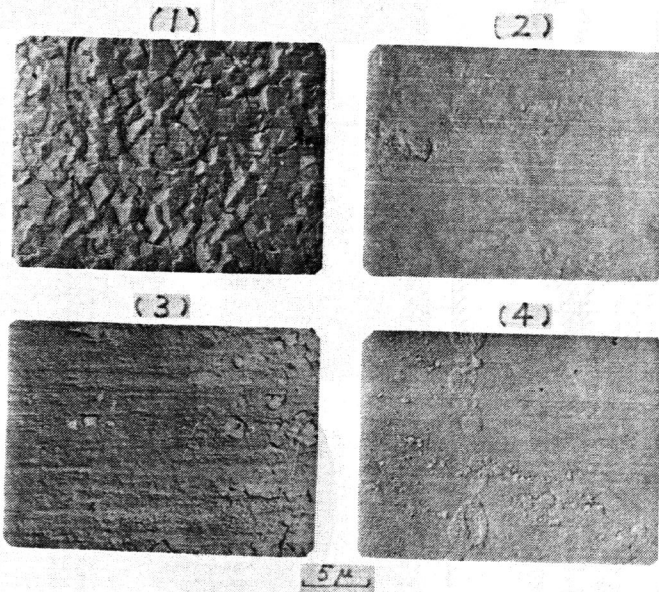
Fractured Surface of WC-3.5% Co B-type Anvil
